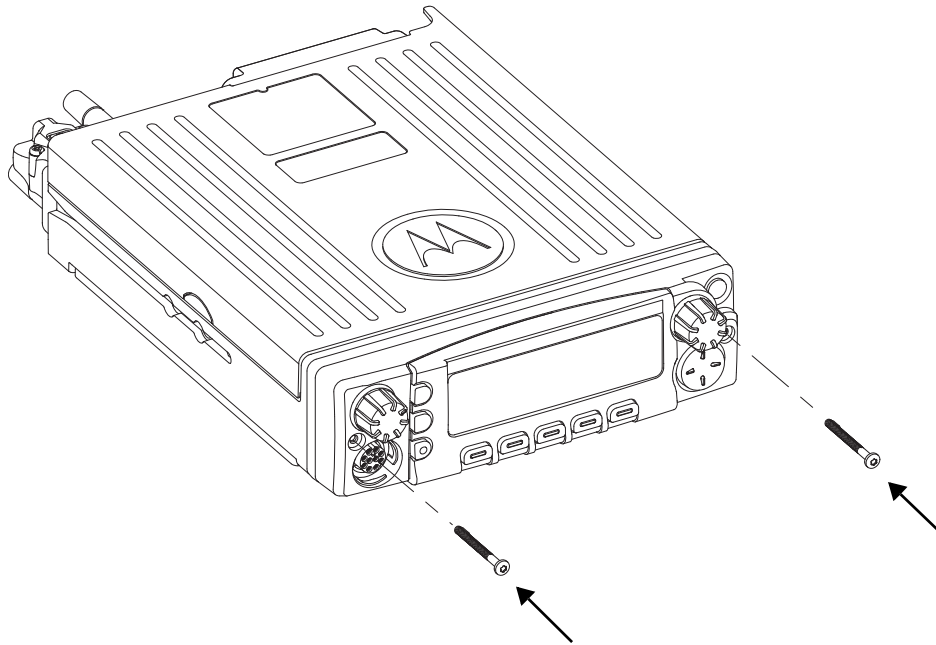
Aligning Control Head/TIB front of chassis, and Installing the Control Head/TIB screws
